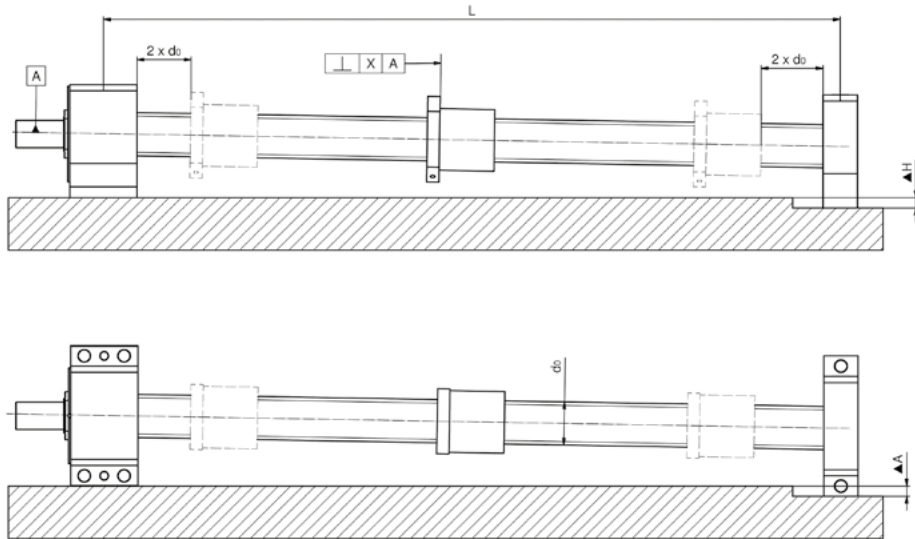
Definition of the assembly tolerances of Ball Screws
